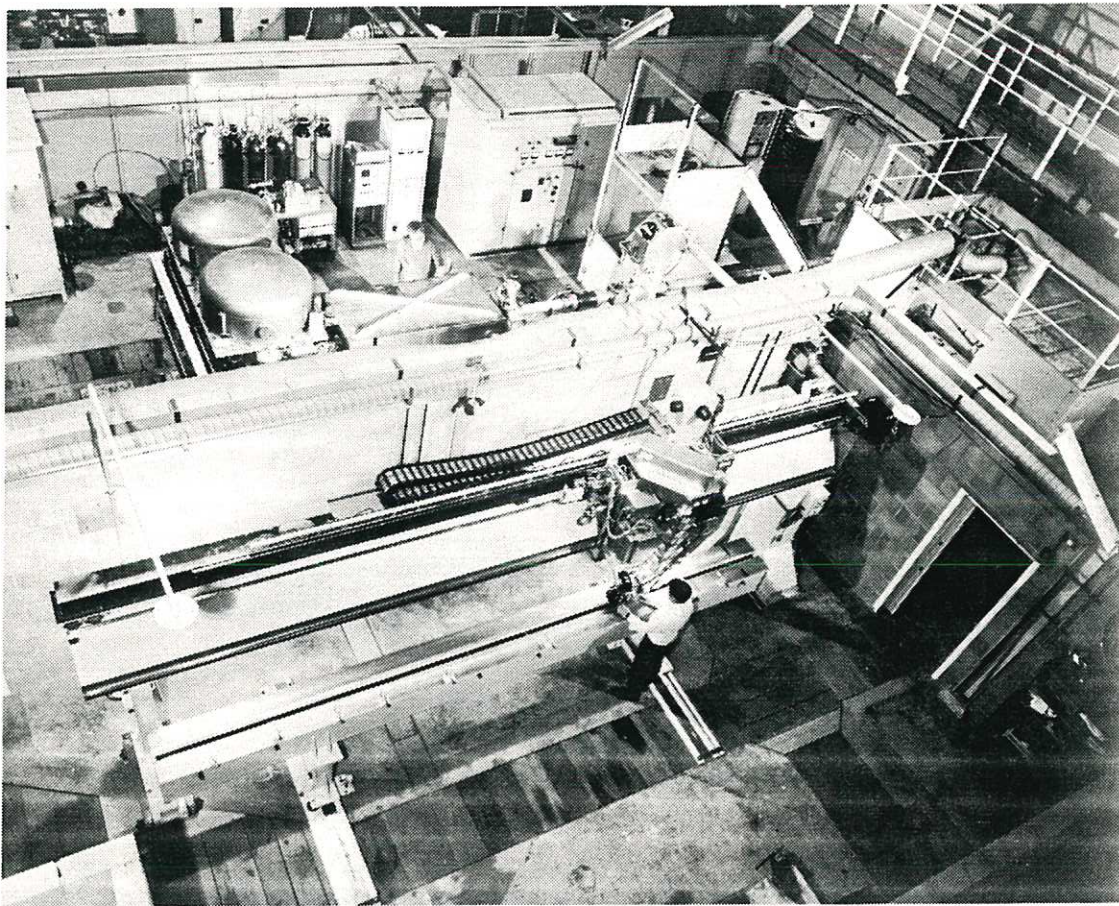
Overhead view of the 10kW CO₂ laser and the 6m welding gantry.
